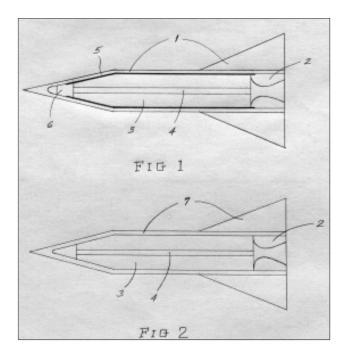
Disappearing Finjets. MBA (Bert Gould) drawing.
